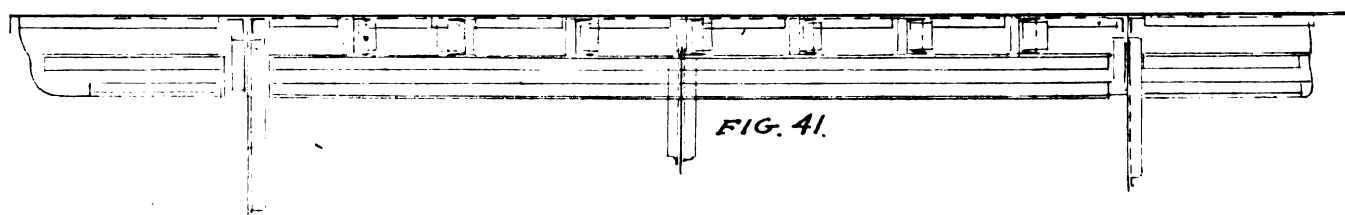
RINGER AT OUT BOARD END OF HATCHES
